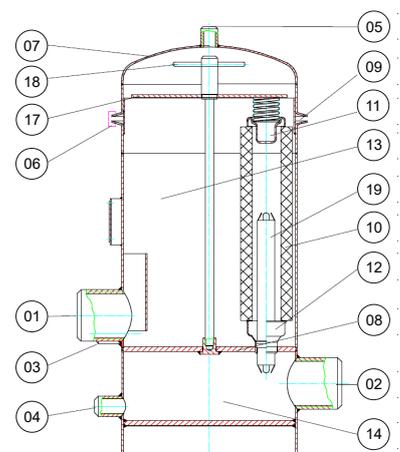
Exploded drawing of a GENO-activated carbon filter AKF
